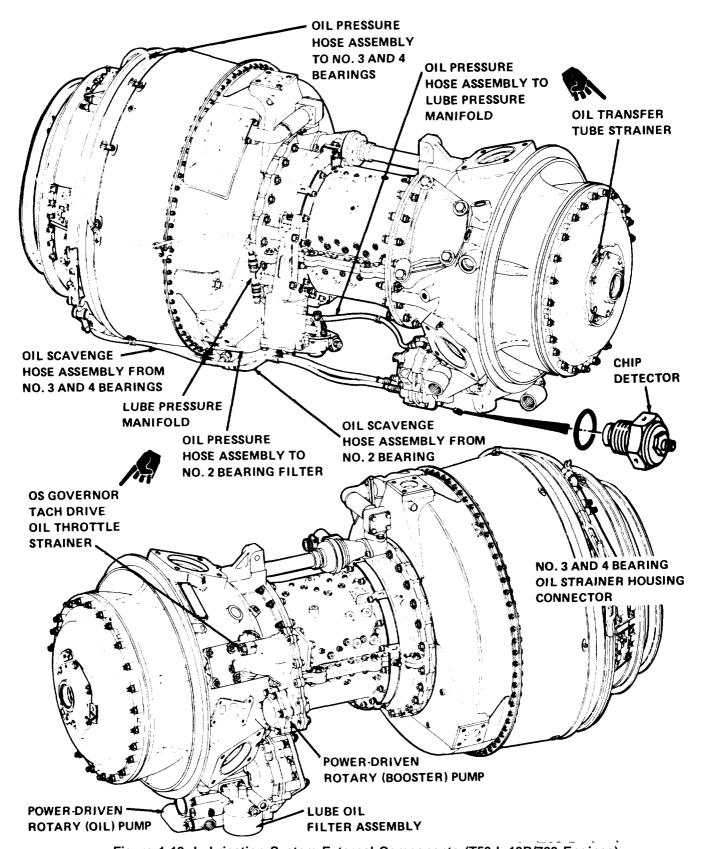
Lubrication System External Components (T53-L-13B/703 Engines)
